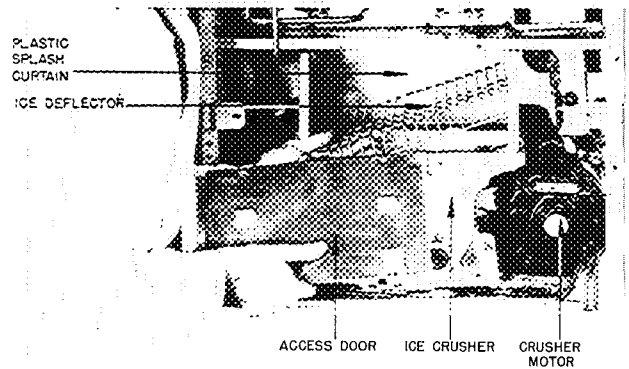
REMOVING ACCESS DOOR AND ICE DEFLECTOR
